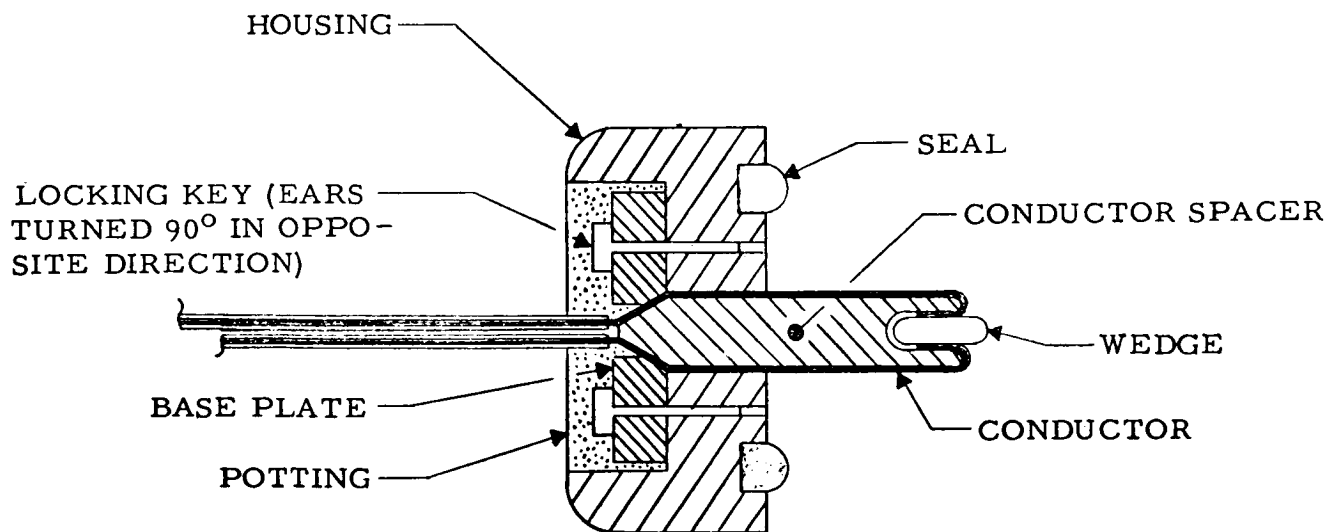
PREMOLDED RECTANGULAR PLUG (SECTION)
